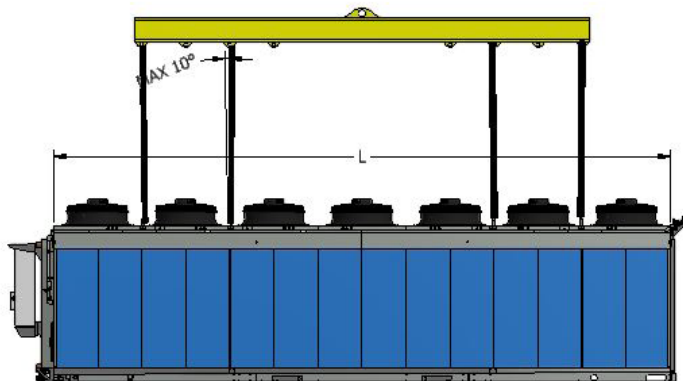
TSDx2-xxx-43.4 Side View (14 Fan)
